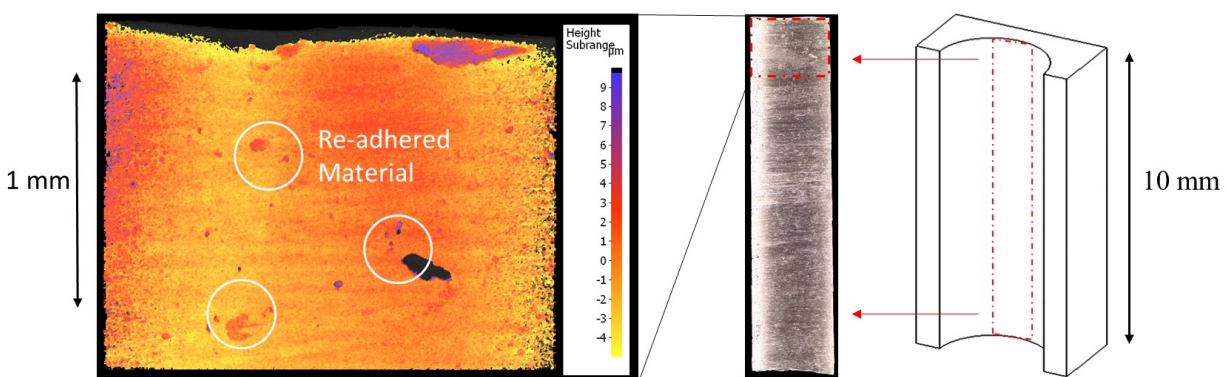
Alicona image of re-adhered material on the machined surface hole drilled using a coated tool at $V_f = 275\ \text{mm/min}$ and $V_s = 46.4\ \text{m/min}$ including the scan location with in the hole.
